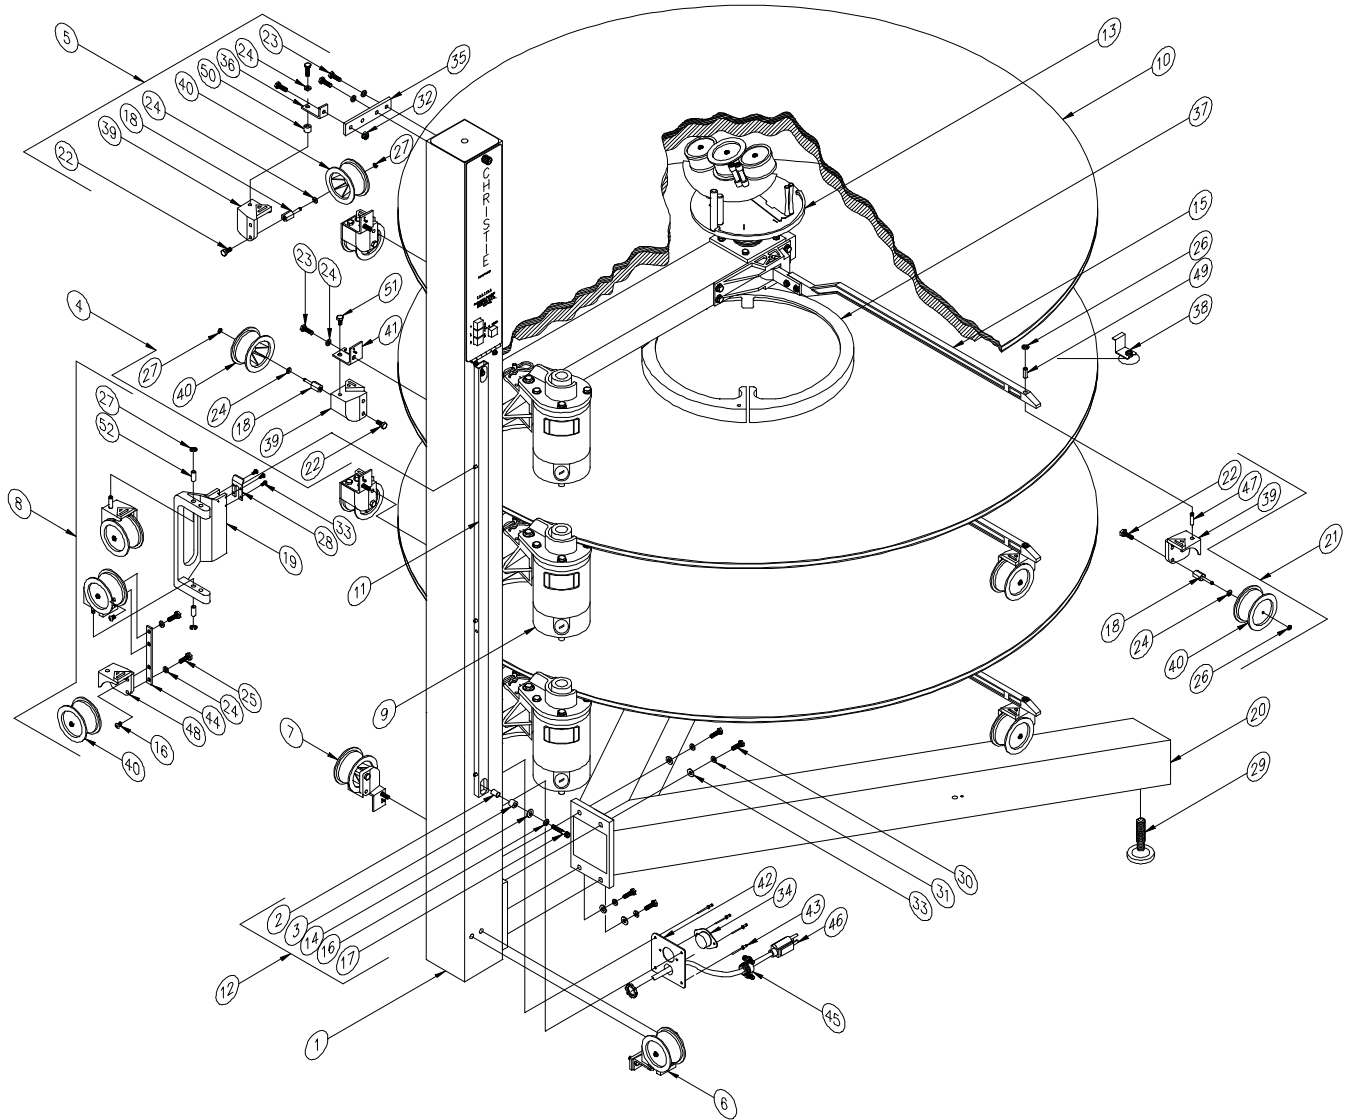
Autowind AW-3R Final Assembly Diagram
